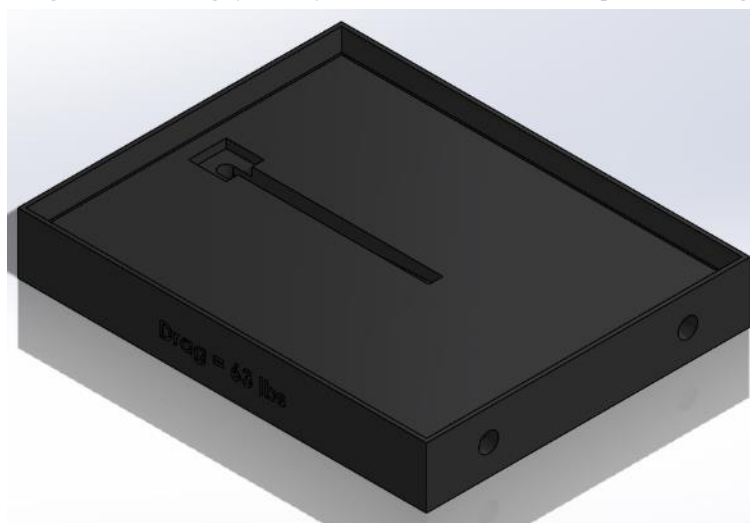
Drawing of Drag for Fluorescent Penetrant Inspection Testing
